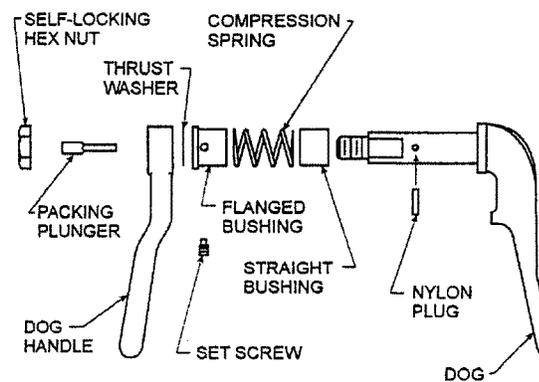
A. Individual Dog Assembly with Self-Lubricating Bushings
